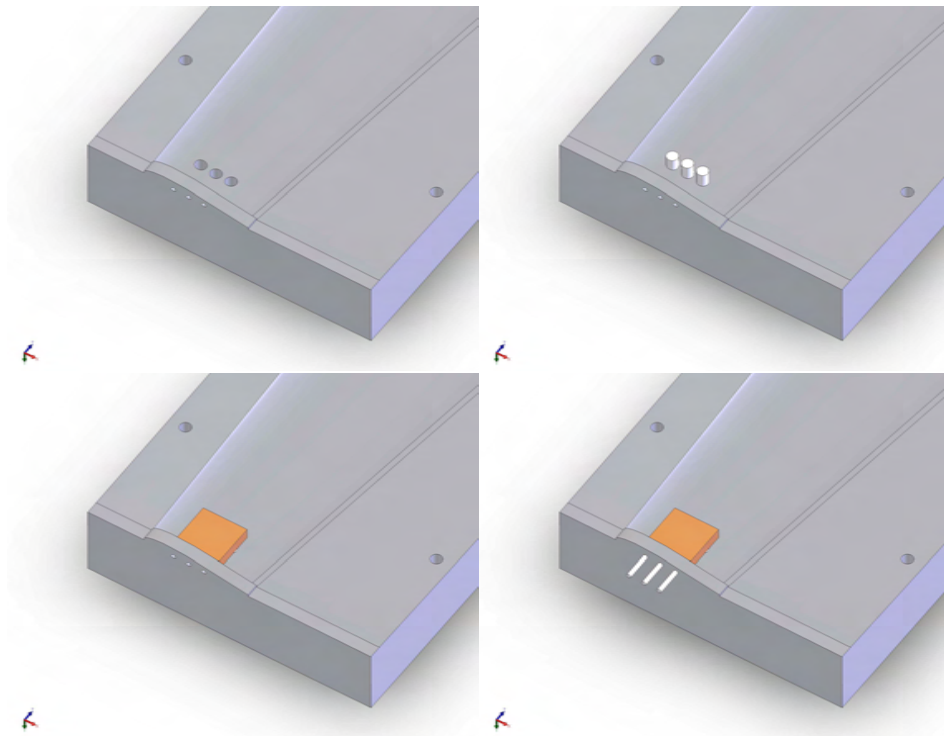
Coupler placement procedure. Top left: empty mold; top right: coupler alignment dowels inserted; bottom left: coupler block placed on alignment dowels; bottom right: alignment bolts inserted.
